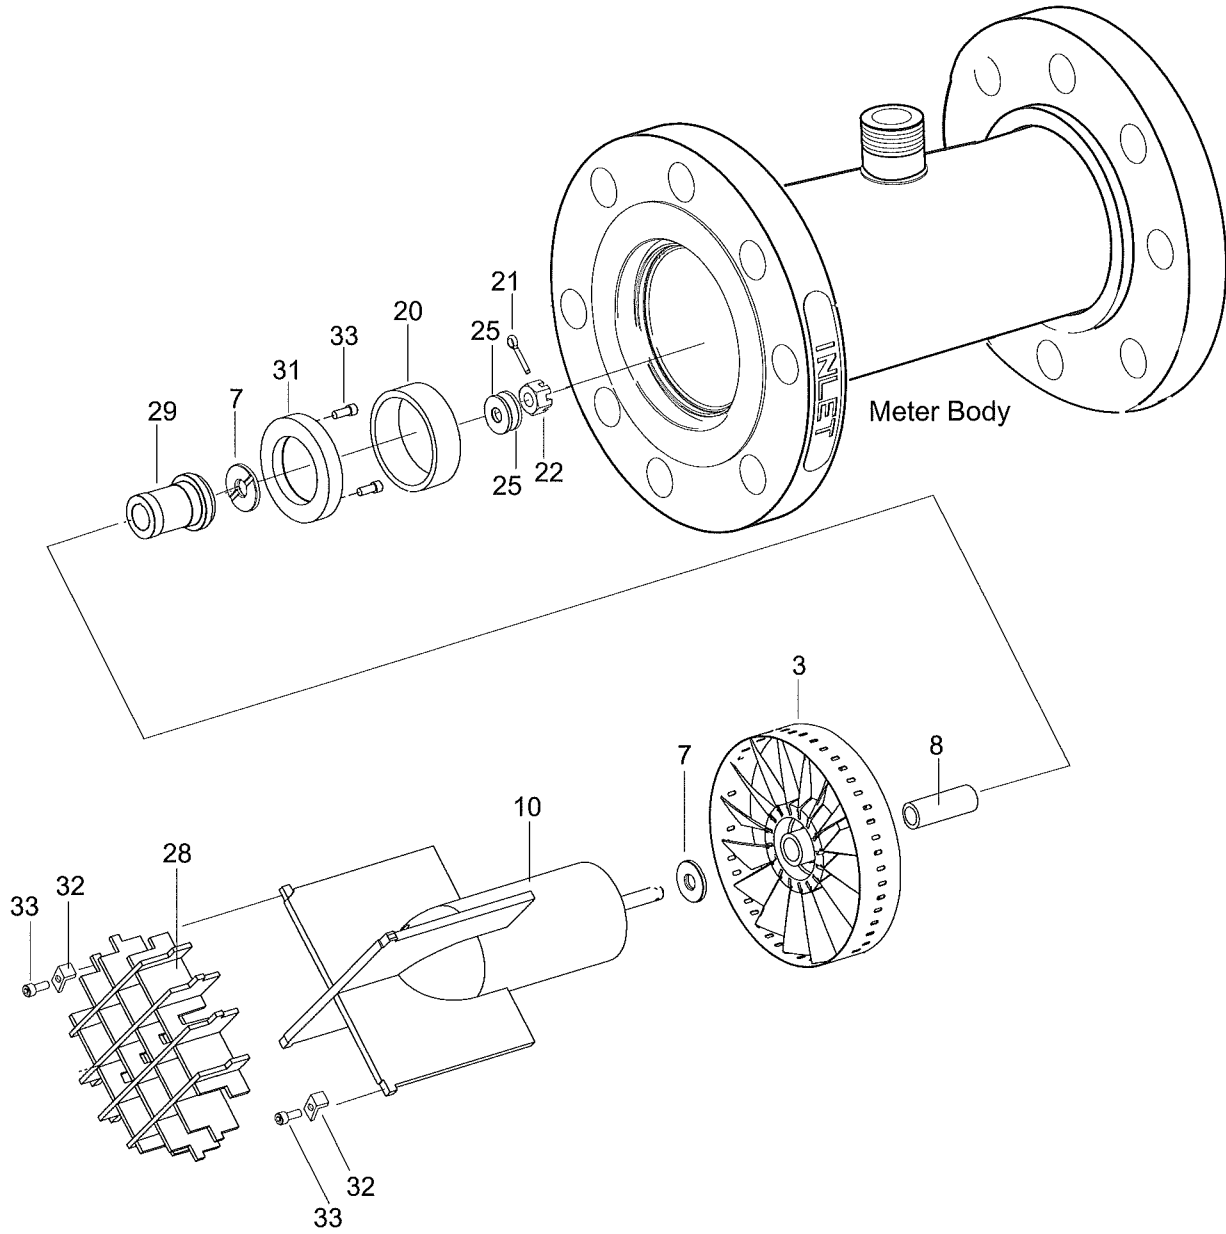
6" and 8" Sizes Assembly Illustration
